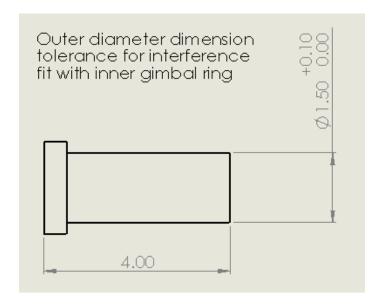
Gimbal sleeve bearing OD tolerance
